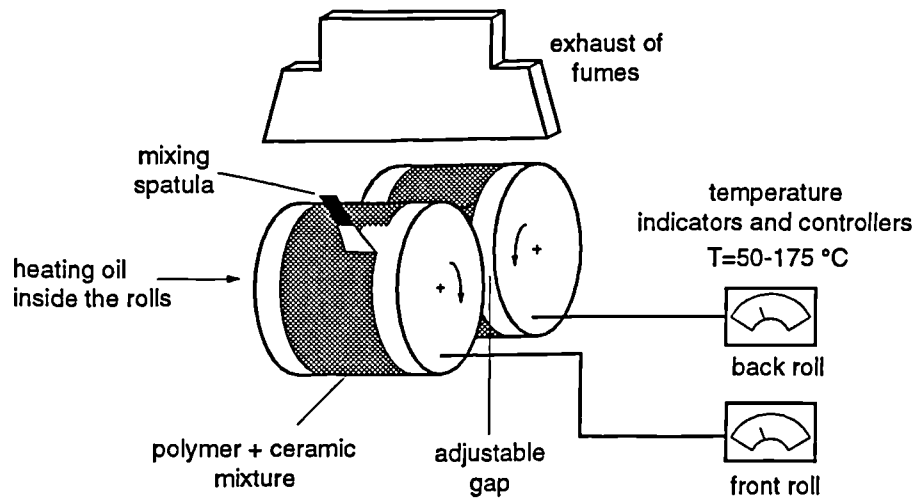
Schematic of the hot-roll milling fabrication technique
